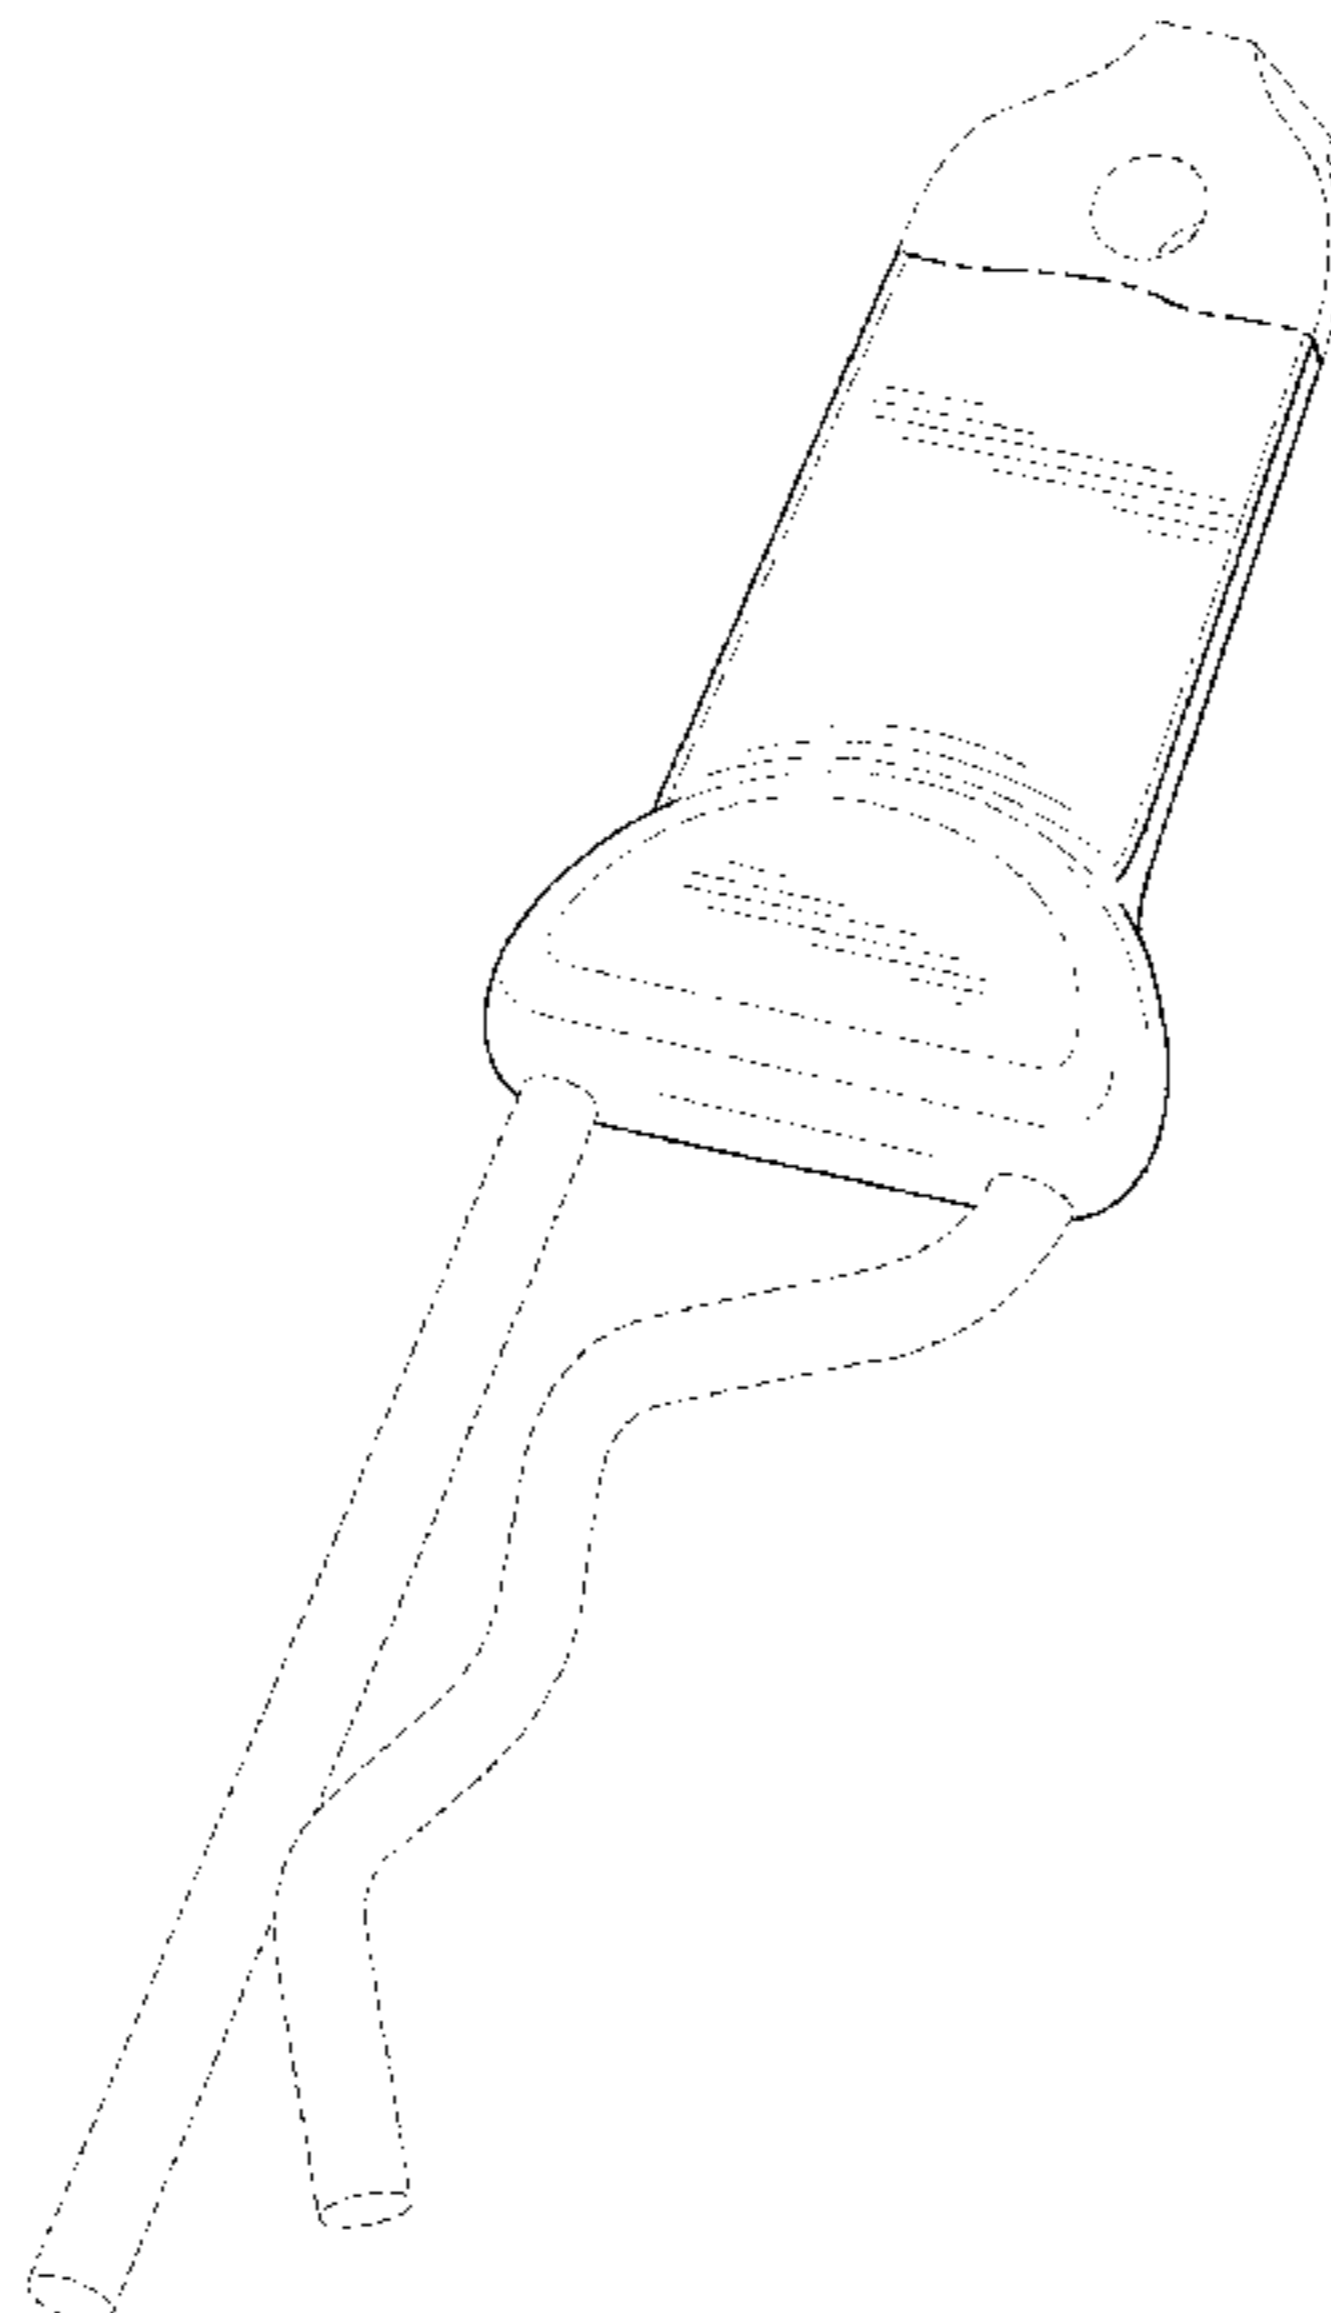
is a side perspective view of the pin assist device showing my new design;
